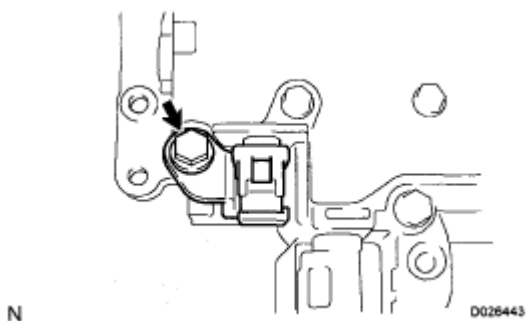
Locating Shift Solenoid Valve DSL Bolt
